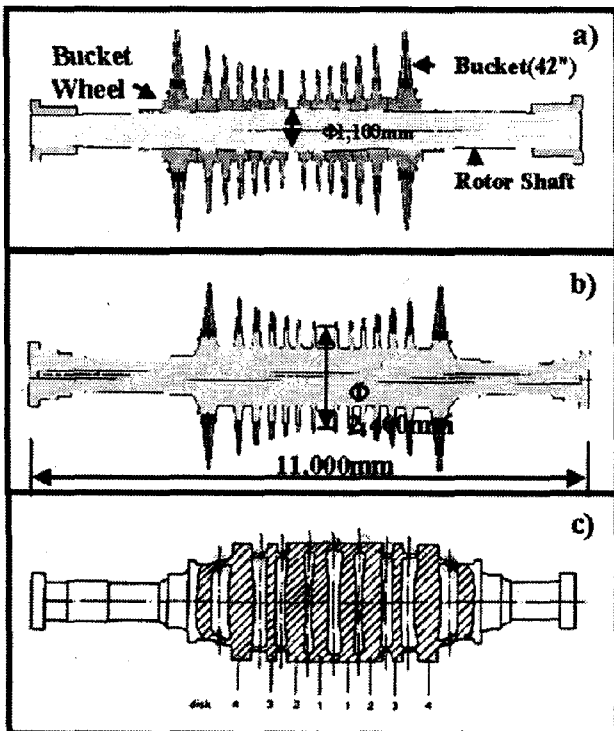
Schematic drawing of LP rotor for nuclear power plant. a) Shrunken-on disc type b) Mono-block type c) Welded type
